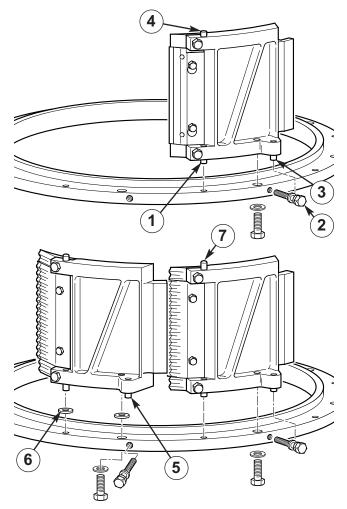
Installing slicing shoes (top) and shredding shoes (bottom). (1) Pivot Pin, (2) Adjusting Screw, (3) Adjustment Pin, (4) Locating Pin, (5) Shoe with longer pin extensions toward spacers, (6) Spacer, (7) Shoe with longer locating pin
